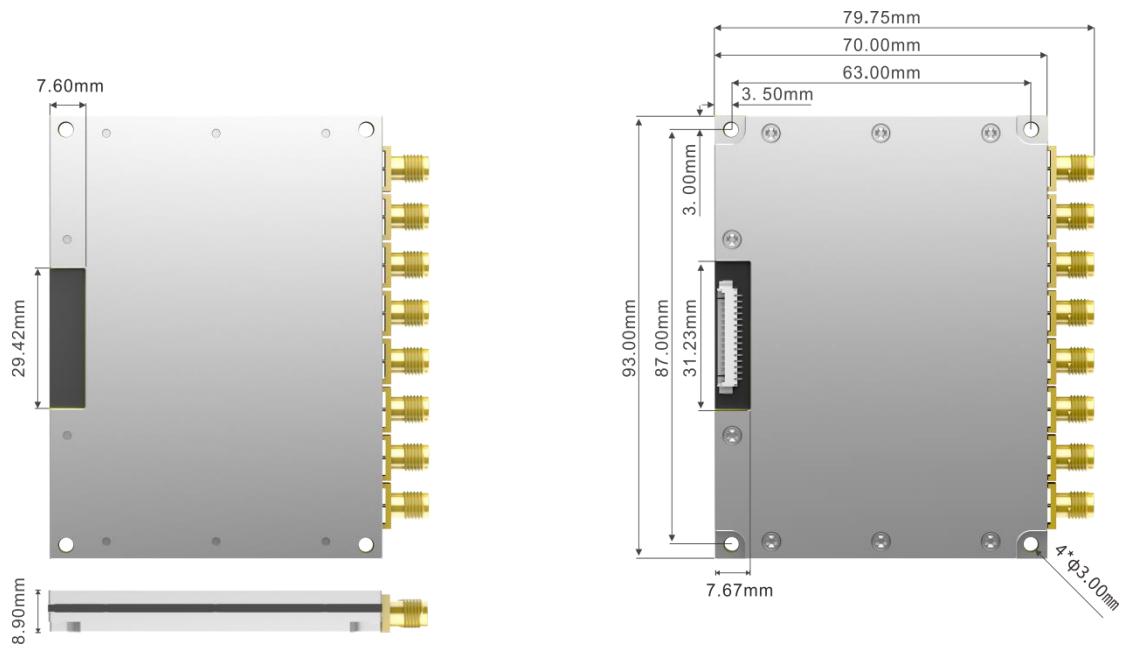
c Multi-Channel Module (CM710-8) Appearance and Dimension
